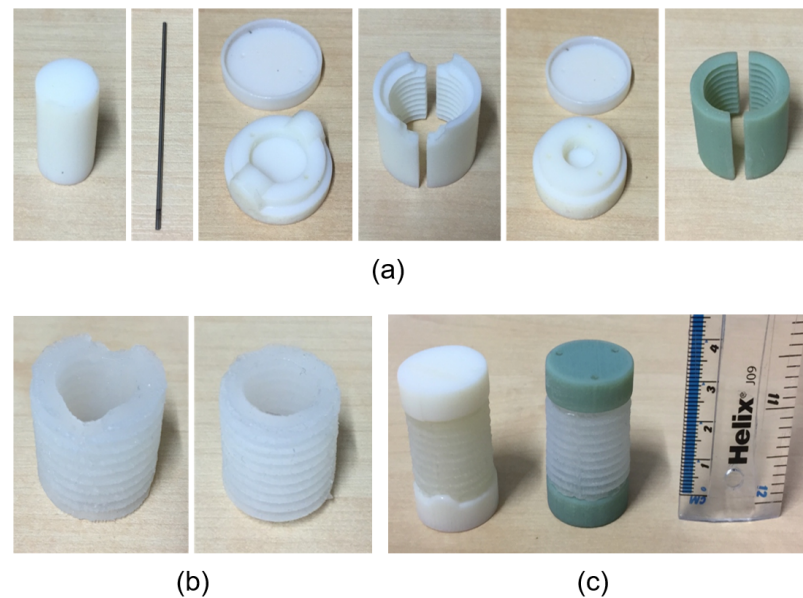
(a) The mould for the fabrication of the bellows-like structure. (From left to right) Cylinder, stainless pin, top and bottom cap for fabricating bellows-like structure for revolute joint, bellows-like cylindrical components (bellows for revolute joint), to and bottom cap for fabricating bellows-like structure for spherical joint, and two bellows-like cylindrical components (bellows for spherical joint). (b) Bellows-like structure for revolute joint (left) and spherical joint (right). (c) Controllable stiffness revolute joint (left) and spherical joint (right).
